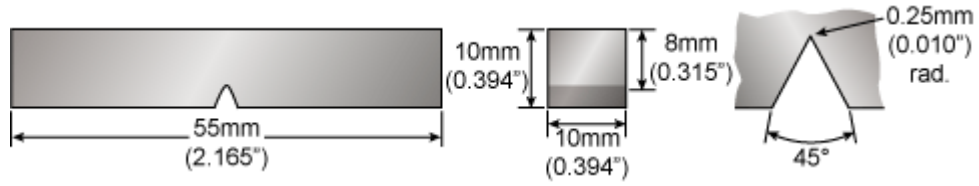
Geometry of Charpy V-Notch impact test specimen
